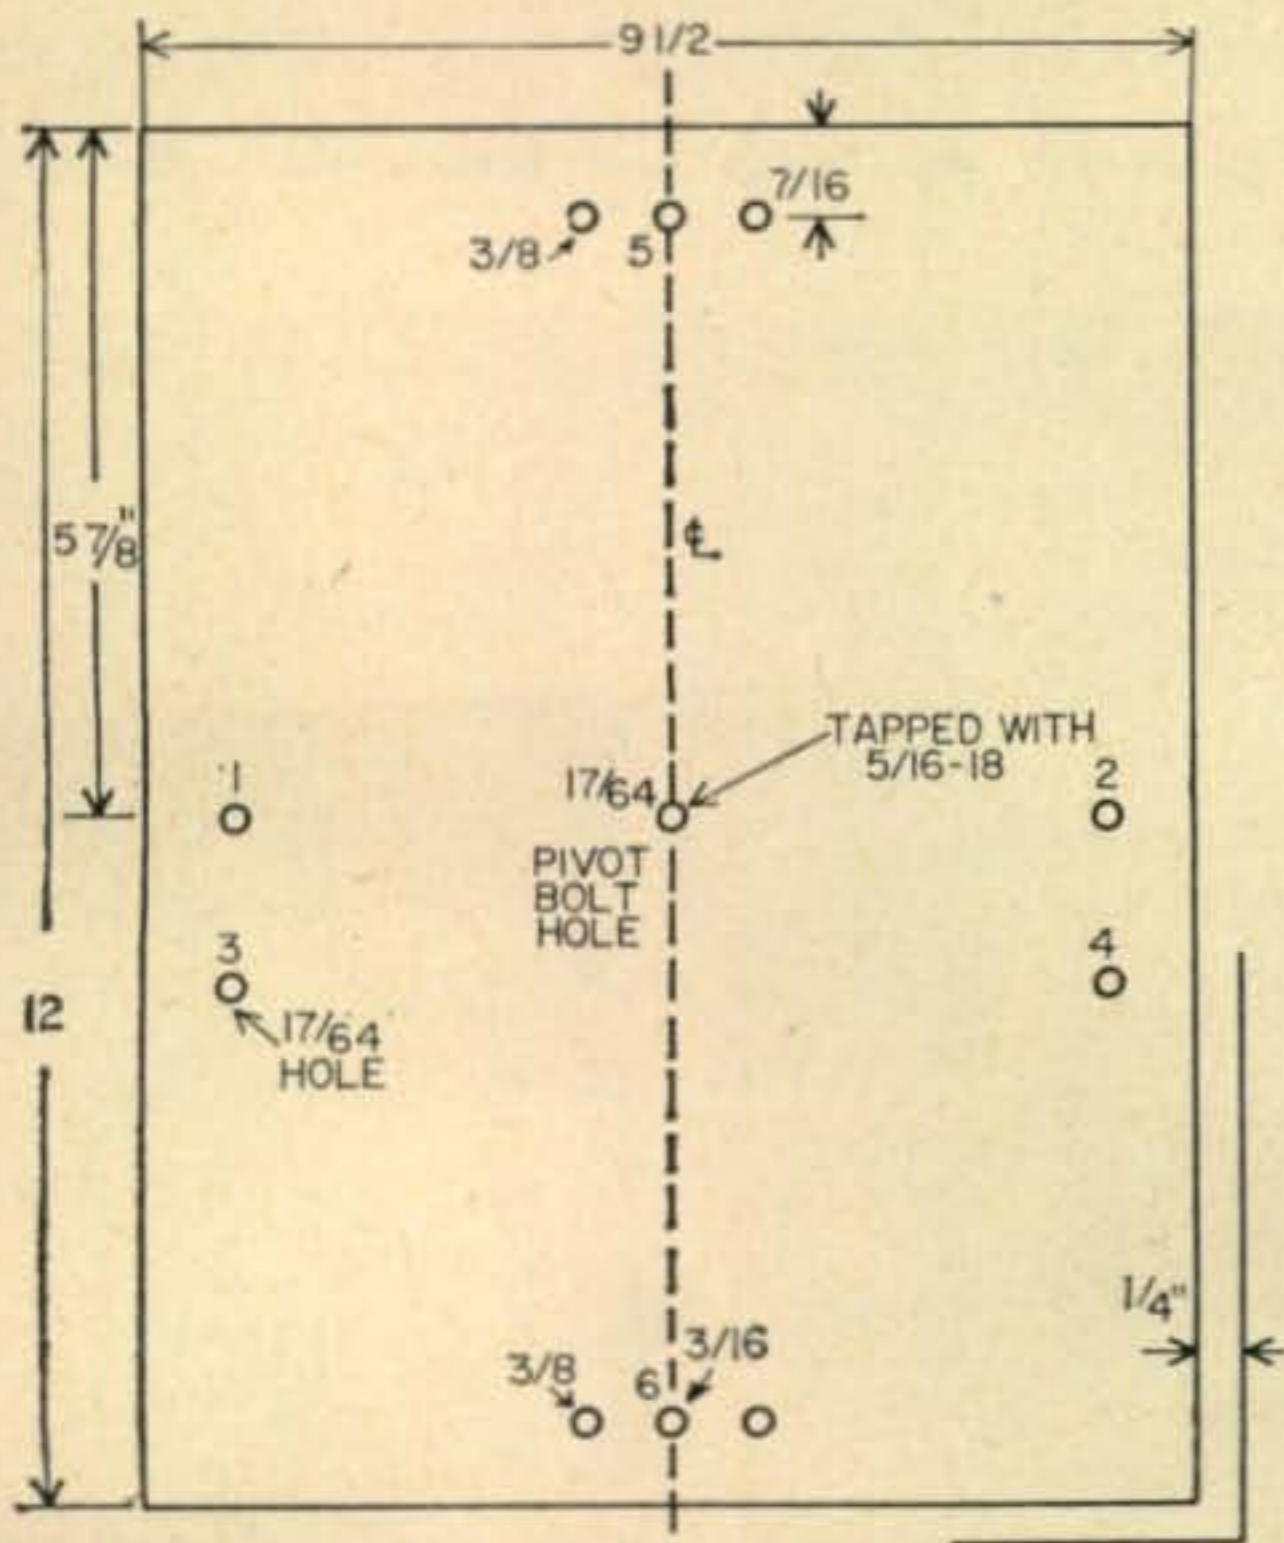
Plate for full size 20 meter beam. Holes 1, 2, 3 and 4 (for $\frac{1}{4} \times 1$ inch bolts) are drilled with the clamp angle aluminum and boom assembly all tightened and mounted on the pivot bolt and clamped to the aluminum plate with a pair of vise grip pliers as shown in fig. 3. This assures that all four holes will always line up.
